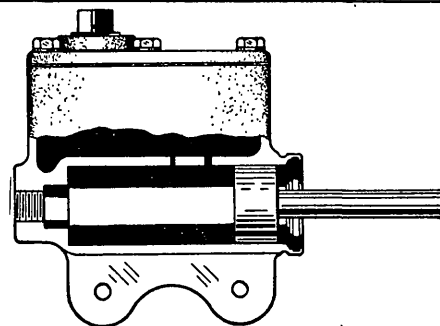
Using No-Go gauge when inspecting master or wheel cylinder (master cylinder shown)
